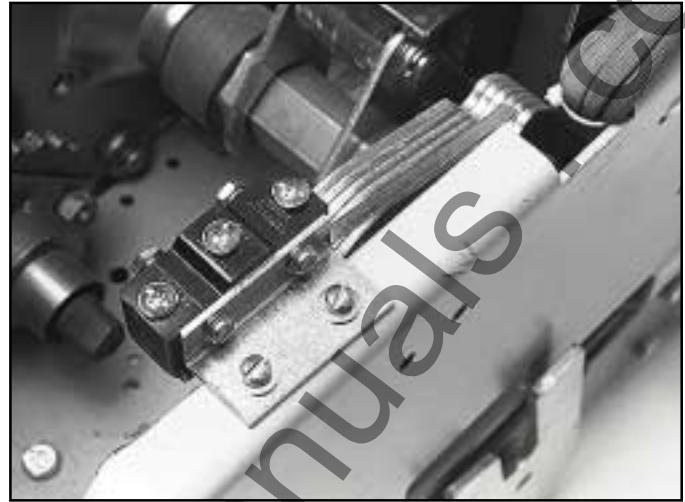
Auxiliary Switch Assembly Mounted to the Breaker.
